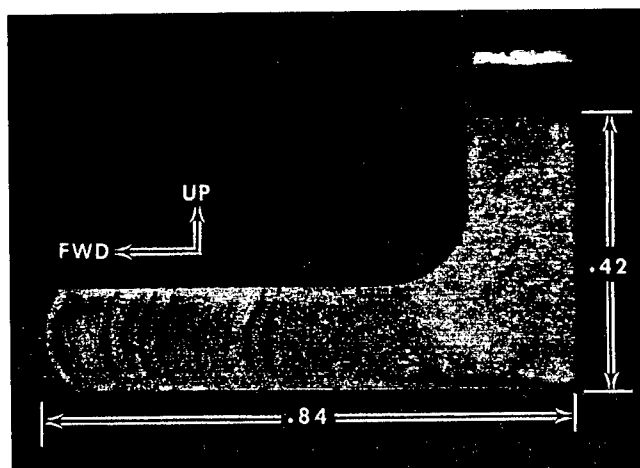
CZ-180, Stiffener S9, Hole 32, Web Drain Hole Crack
